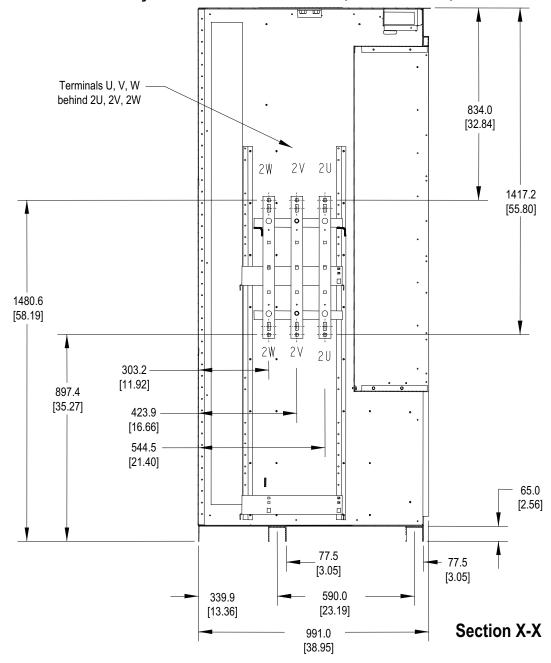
Detail Power Terminal Dimensions (heat sink AFE Rectifier)
